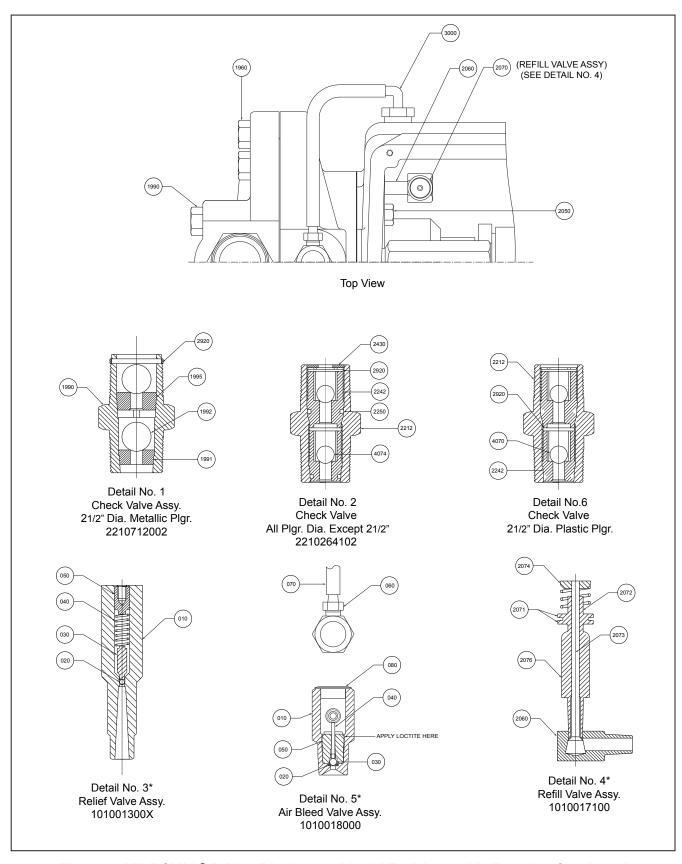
MILROYAL® B Disc Diaphragm Liquid End Assembly Drawing Continued (C-102-2095-0006)
